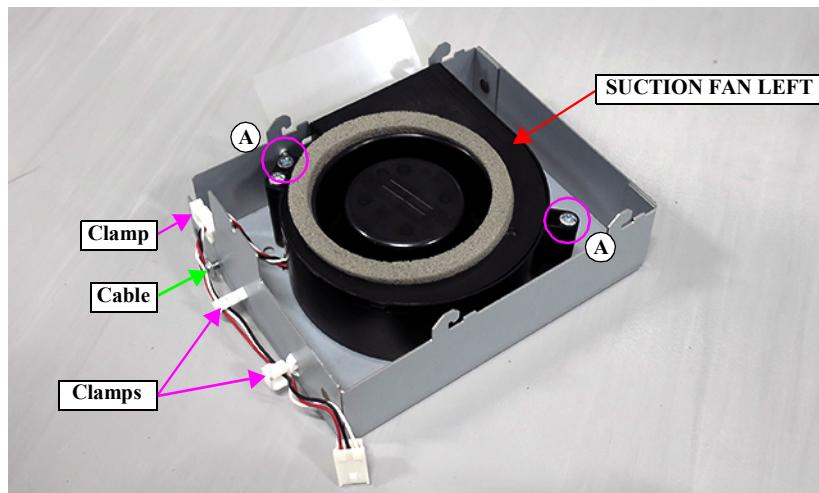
Removing the SUCTION FAN LEFT (3)
